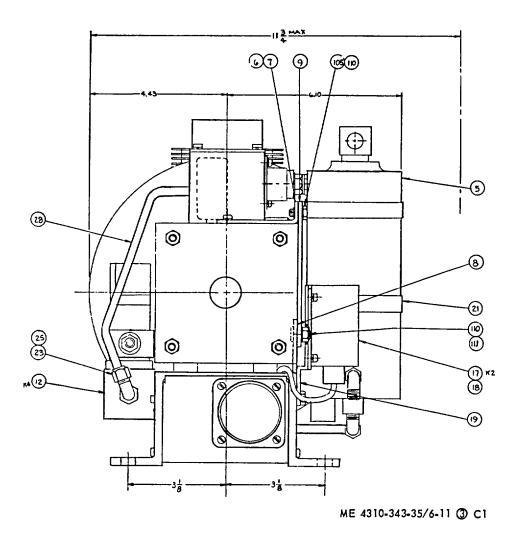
Motor-compressor assembly, Bogue Electric model 6703) (sheet 3 of 5)
